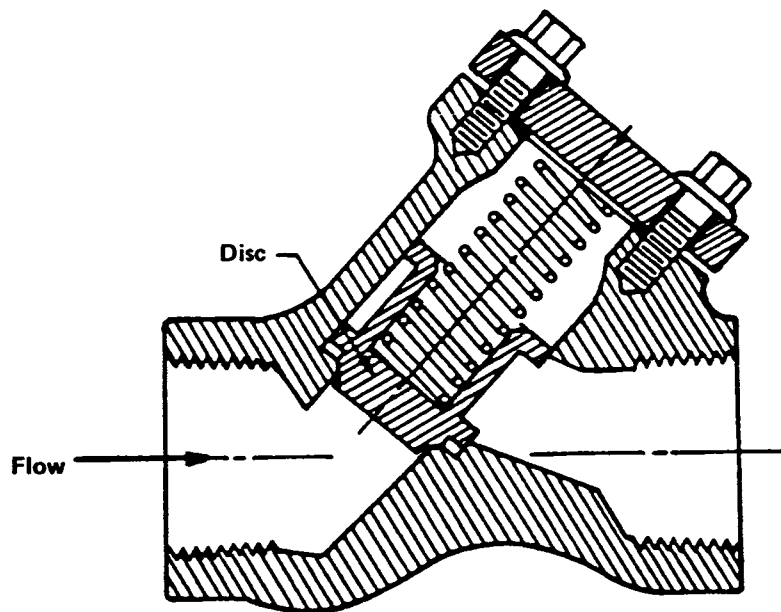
B. Y TYPE SPRING LIFT CHECK VALVE
